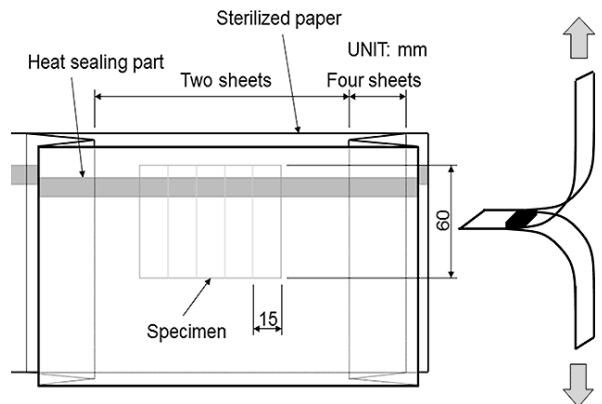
Schematic illustration of heat sealed sample bag and peel test specimen.
